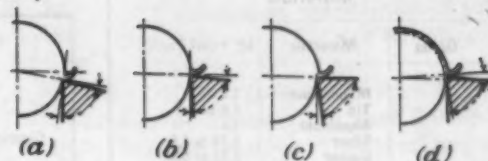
Relation of side and end-cutting edges to work piece. Proper adjustment of endcutting edge (b) is important to obtain good finish.
